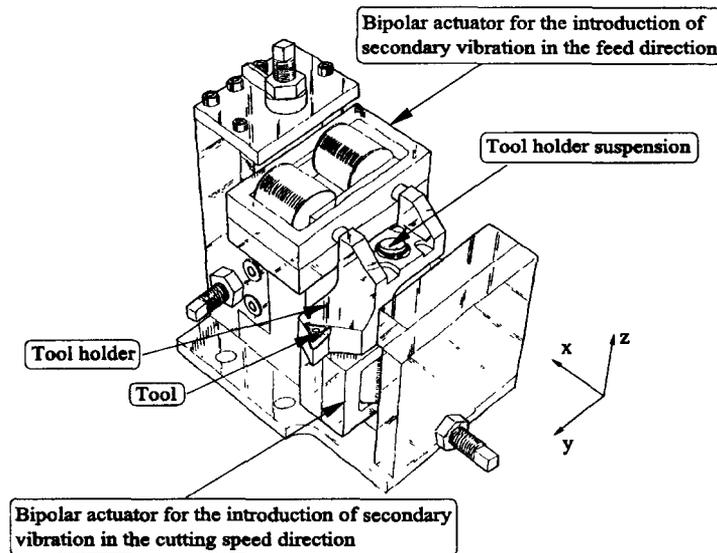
Tool holder with integrated actuators for the control of tool vibrations in the metal cutting process [7].
